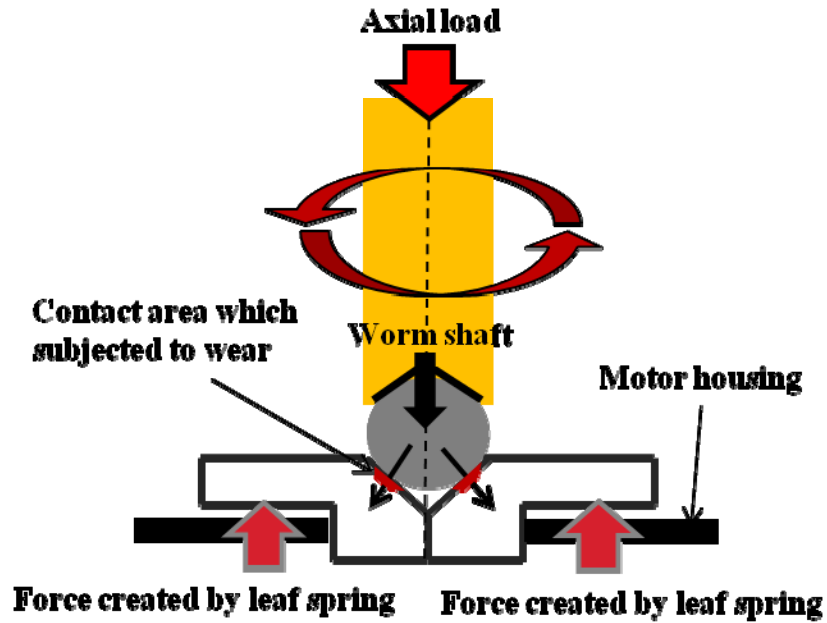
A constant axial load is applied to the bearing while the motor was running.
